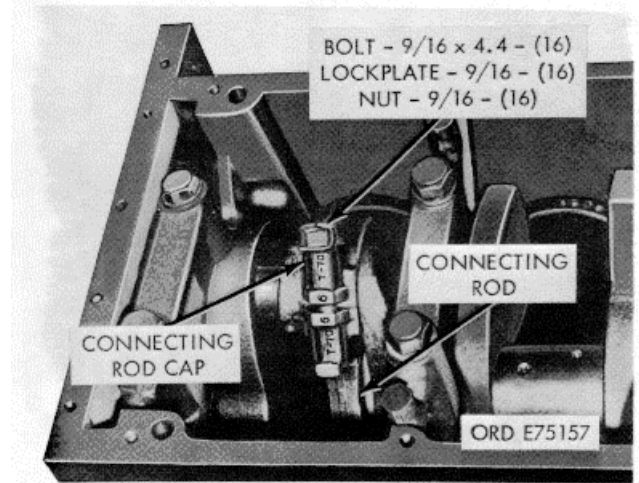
Connecting rod and piston assembly-removal/installation.
